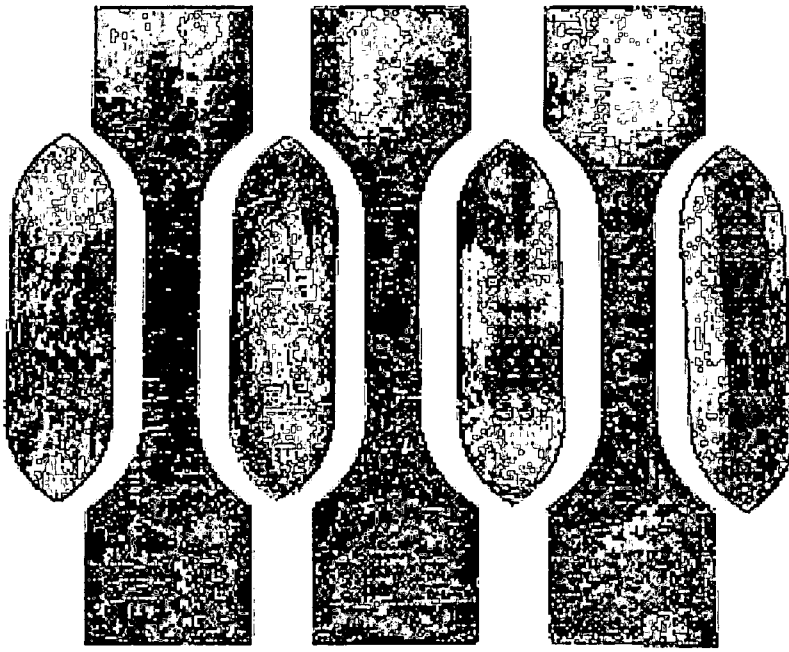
A section of sheet material after WEDM of mechanical test specimens and “cutouts.”
